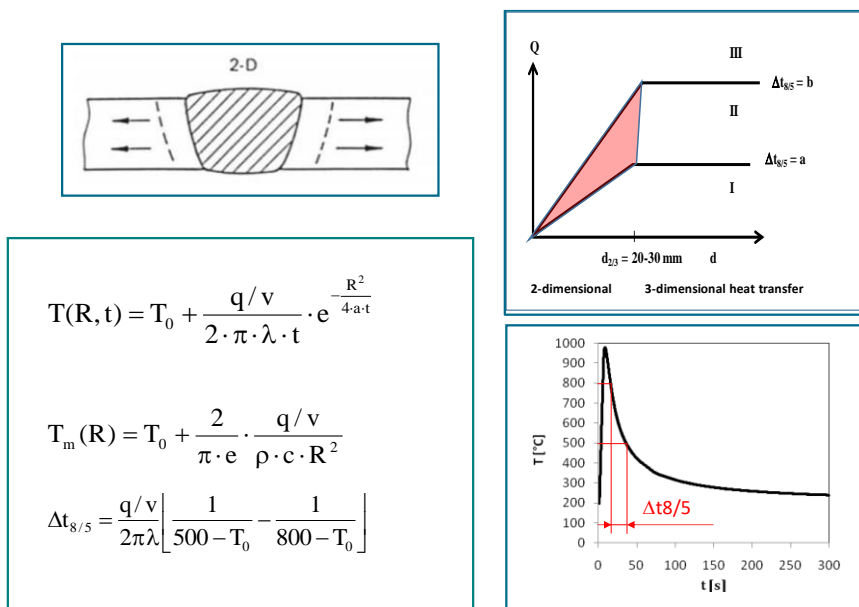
Determination of welding diagram and the influence of weld thermal cycle for 2-D heat transfer during welding
